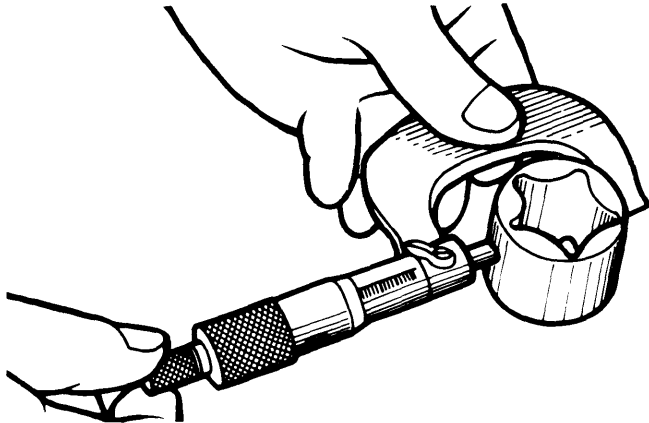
Measuring Outer Rotor Diameter for Clearance
